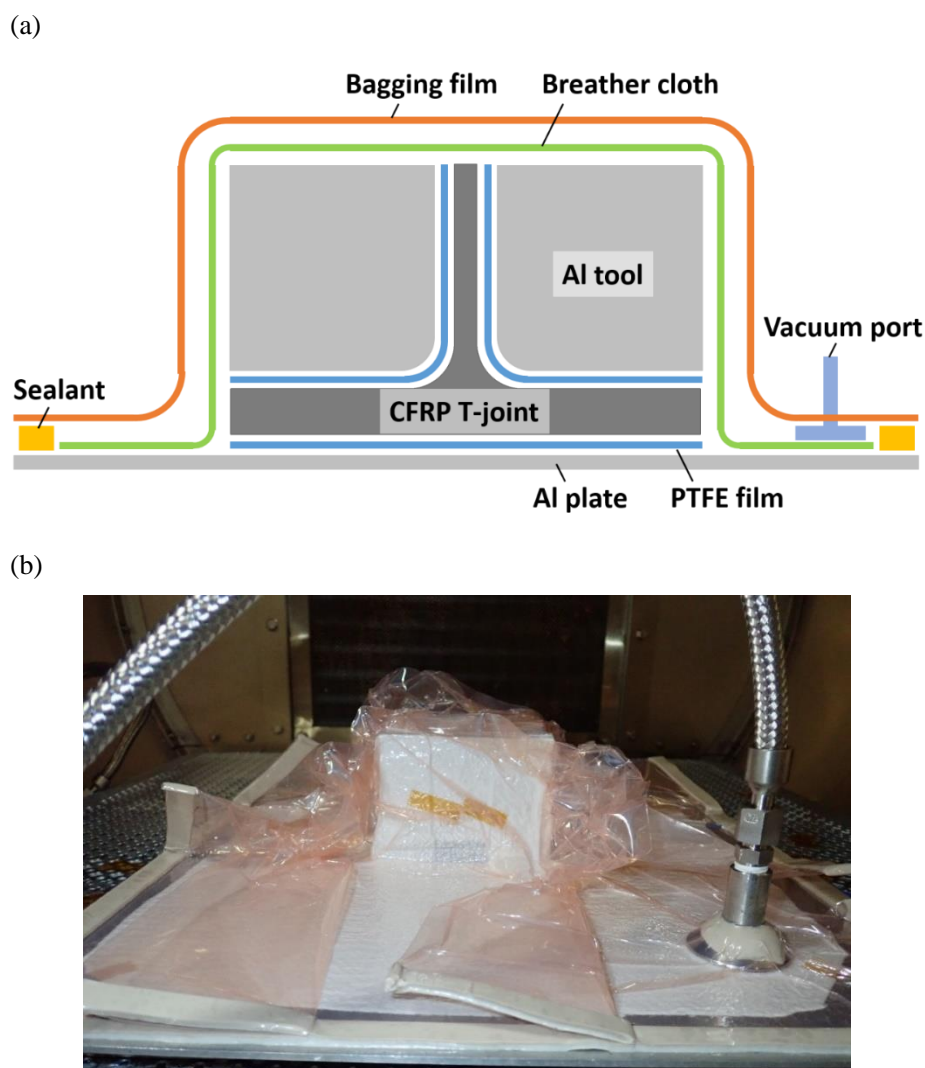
Assembly and bagging of specimen. (a) Schematic. (b) Photograph.
